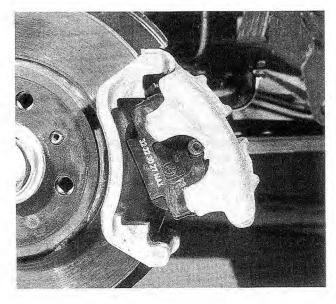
Brake caliper being pivoted up to remove front brake pads.
